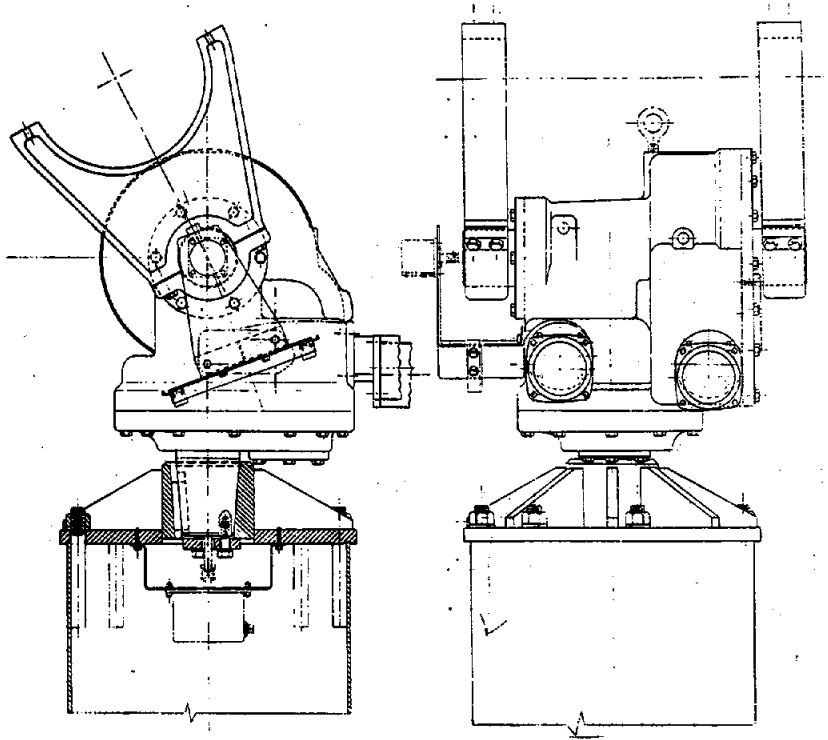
MMC 10 MWe Solar Power Plant Drive Mechanism Assembly
